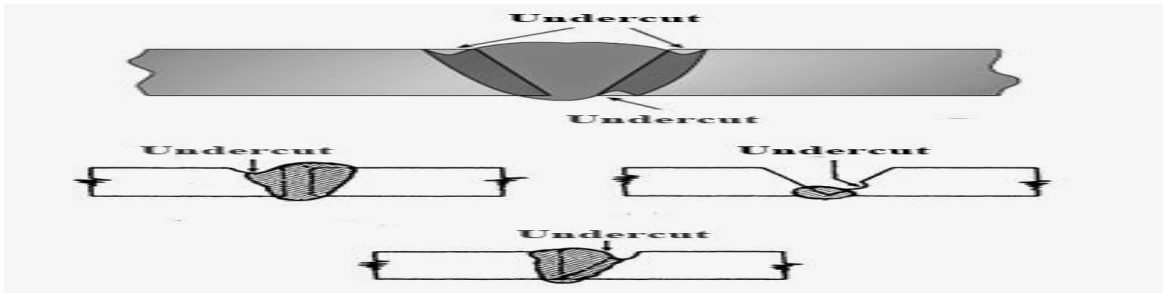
(c) Welding defect: undrcut and slag inclusion [8]
